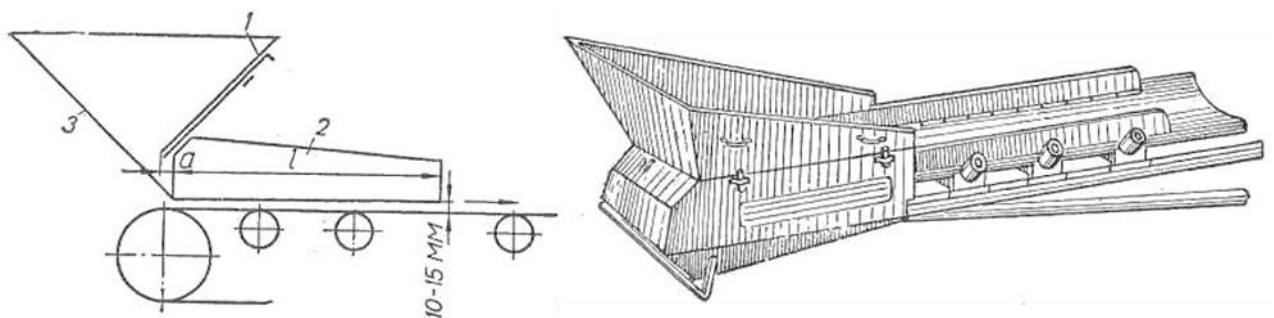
Loading a belt conveyor: 1 - latch; 2 - chute; 3 - guide boards
